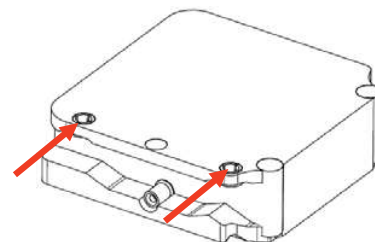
Visual inspection of the locking pin receivers.
